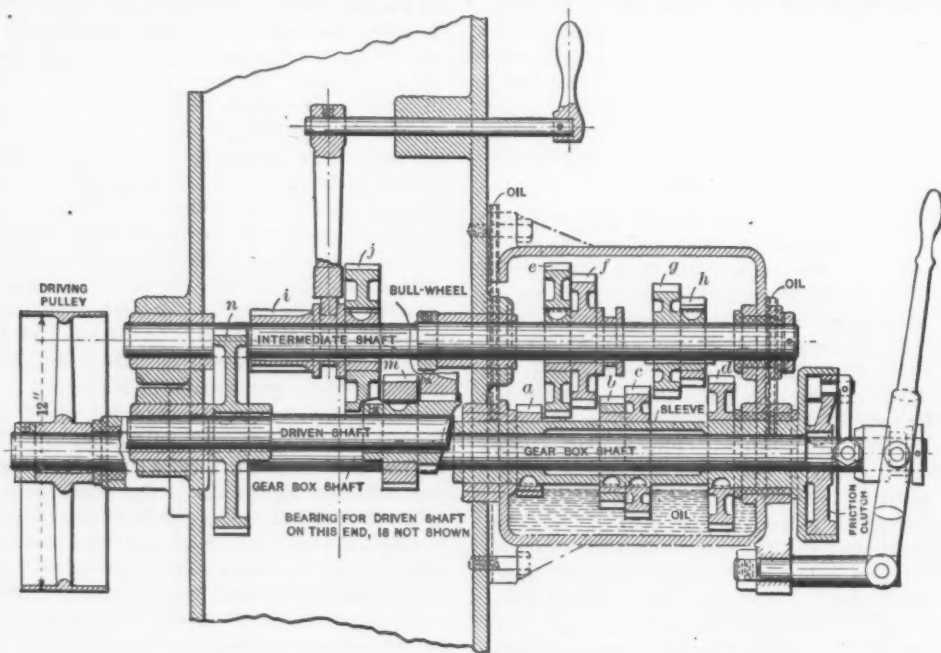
Sectional View of the Gear Box from the Front of the Shaper.
